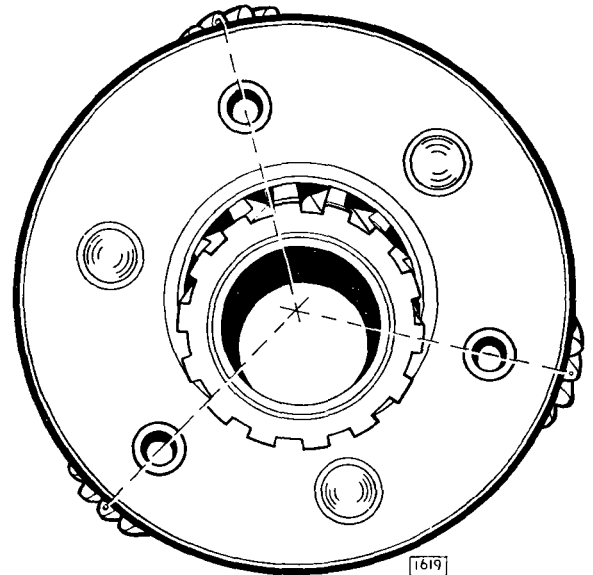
Assembly of the planet gears—note the positions of the marked teeth.
